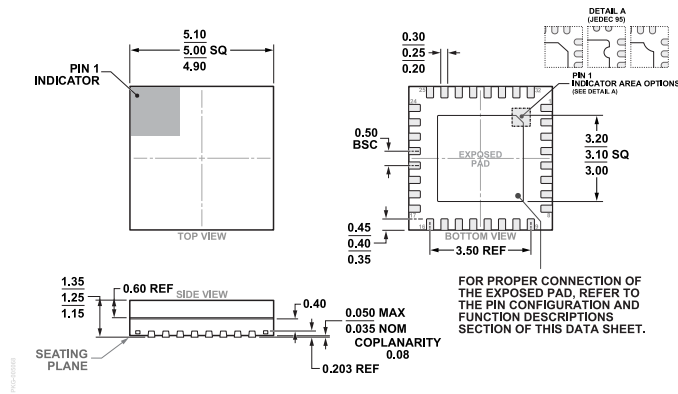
32-Lead Lead Frame Chip Scale Package, Premolded Cavity [LFCSP\_CAV] 5 mm × 5 mm Body and 1.25 mm Package Height (CG-32-2) Dimensions shown in millimeters
